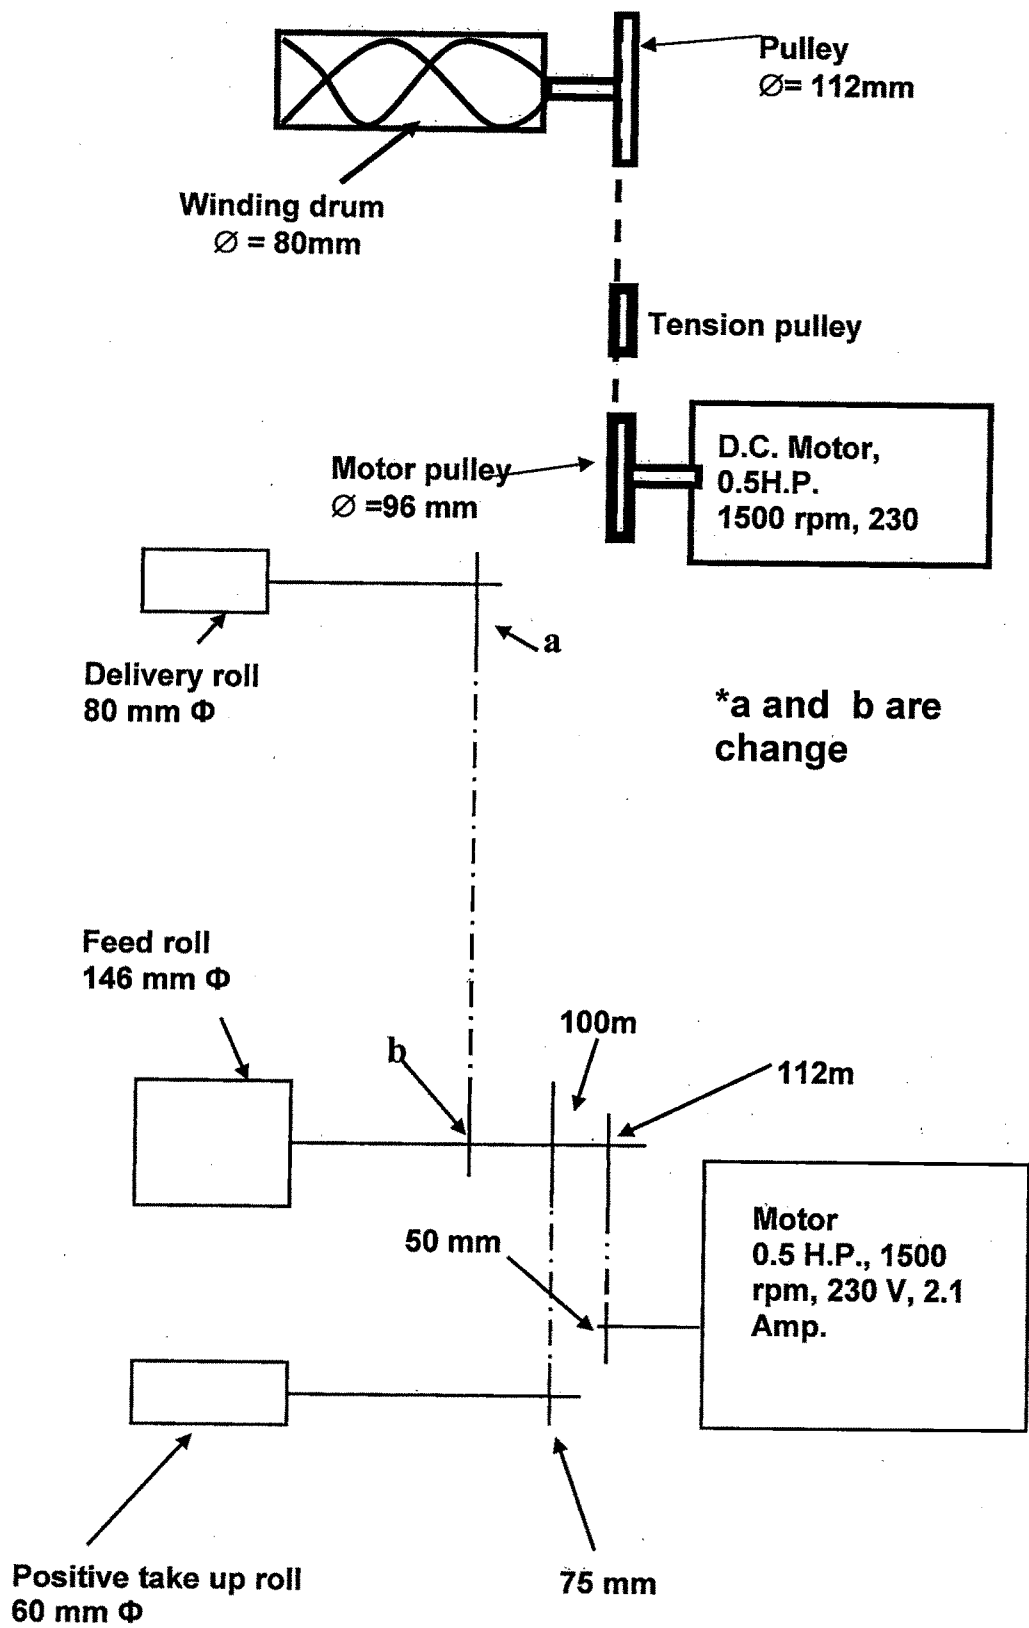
(b) Drive set up of Mechanical Crimp-Texturising Apparatus.
